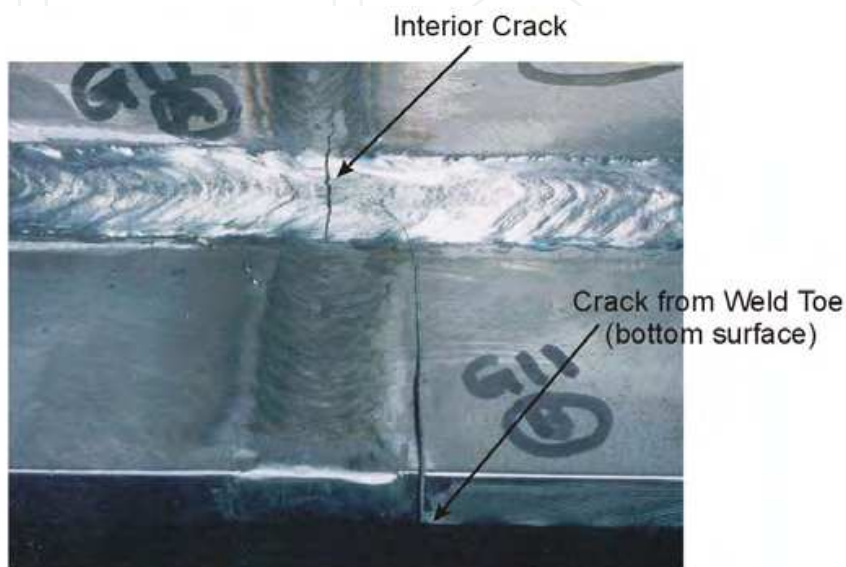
Typical fatigue cracks from groove weld in AL-6XN beam
